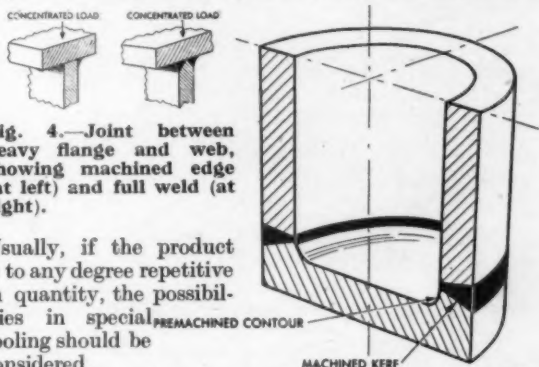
Bottom of hydraulic cylinder, typical of those used in heavy hydraulic presses.
